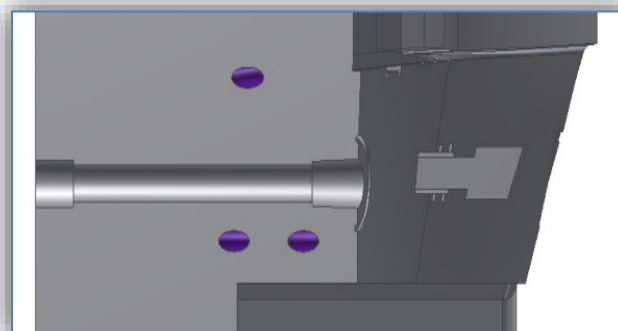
Cooling channels with elliptical cross-section in area of the mould inserts
